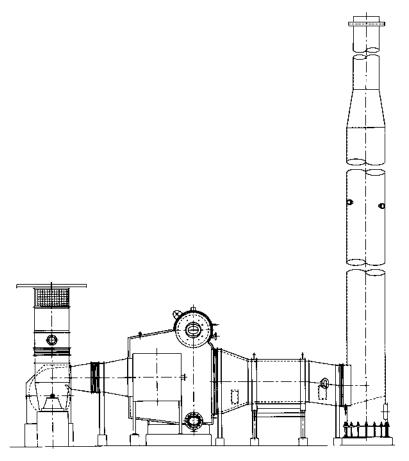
Package water tube boiler. (Courtesy of ABCO Industries, Abilene, TX.)
